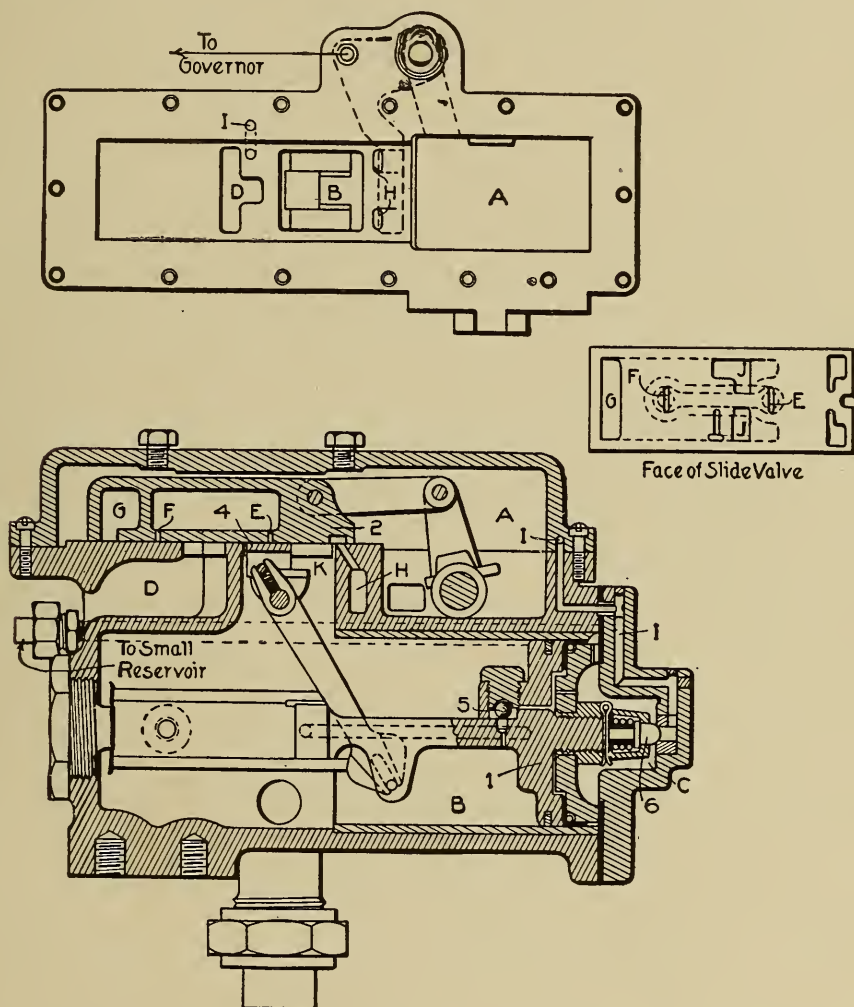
Longitudinal Section of New York Engineer's Brake-Valve in Running Position, Showing also Plan of Valve-Seat (at top) and Face of Slide-Valve (at right).
